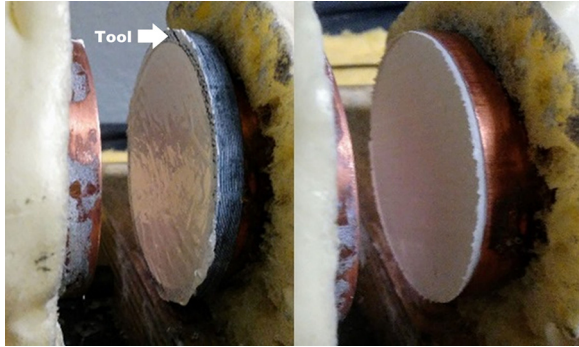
(Left) Tool used to apply the paste; (right) removal of the tool leaves uniform layer of paste on the surface of the copper rod
